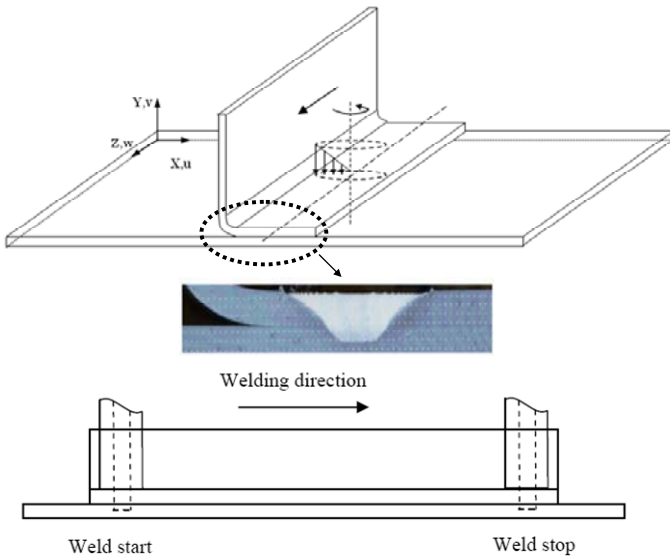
Geometry of a stringer friction stir welded to a plate. Used for coupling of residual stress and in-service load analyses, [22].
